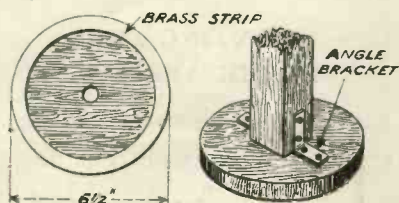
Showing disc on which is mounted the frame aerial support.
